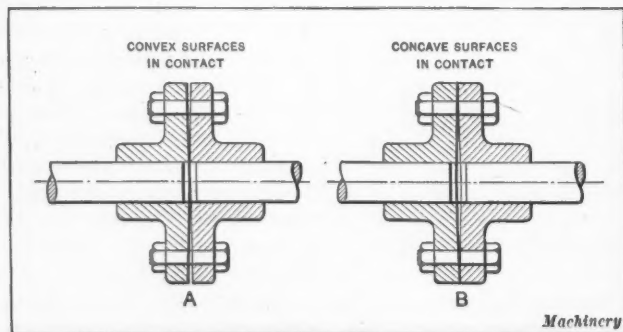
Examples illustrating why Lathe must face Surfaces either Flat or slightly Concave and not Convex
